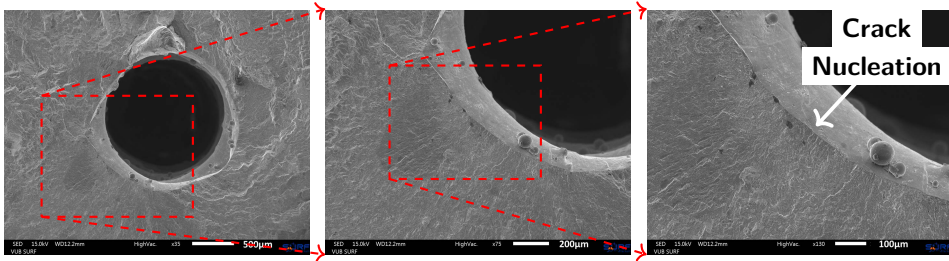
SEM images of the fracture surface of Specimen 12 (AM material with printed capillary) reveal that the fatigue crack initiated from a notch formed by the severe surface roughness at the capillary.
